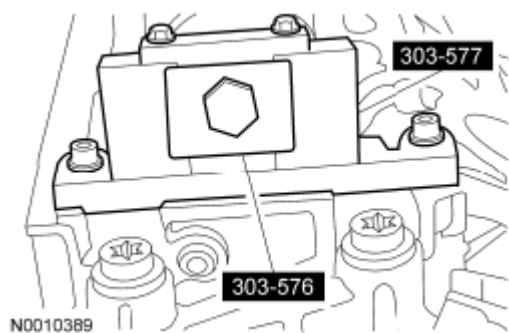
Identifying Camshaft Holding Tool And Adapter For 303-577
